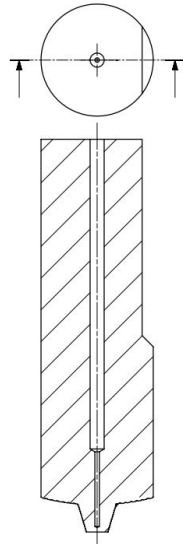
General geometry of a FSW tool. An EDM hole for threading a thermocouple to the center of the pin is shown.
